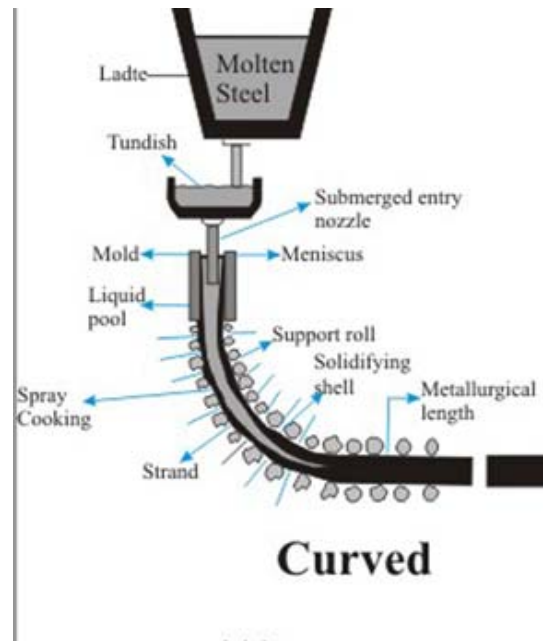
Arrangement of tundish, mold and water spray in a curved mold machine (paste figure 2.3a)
